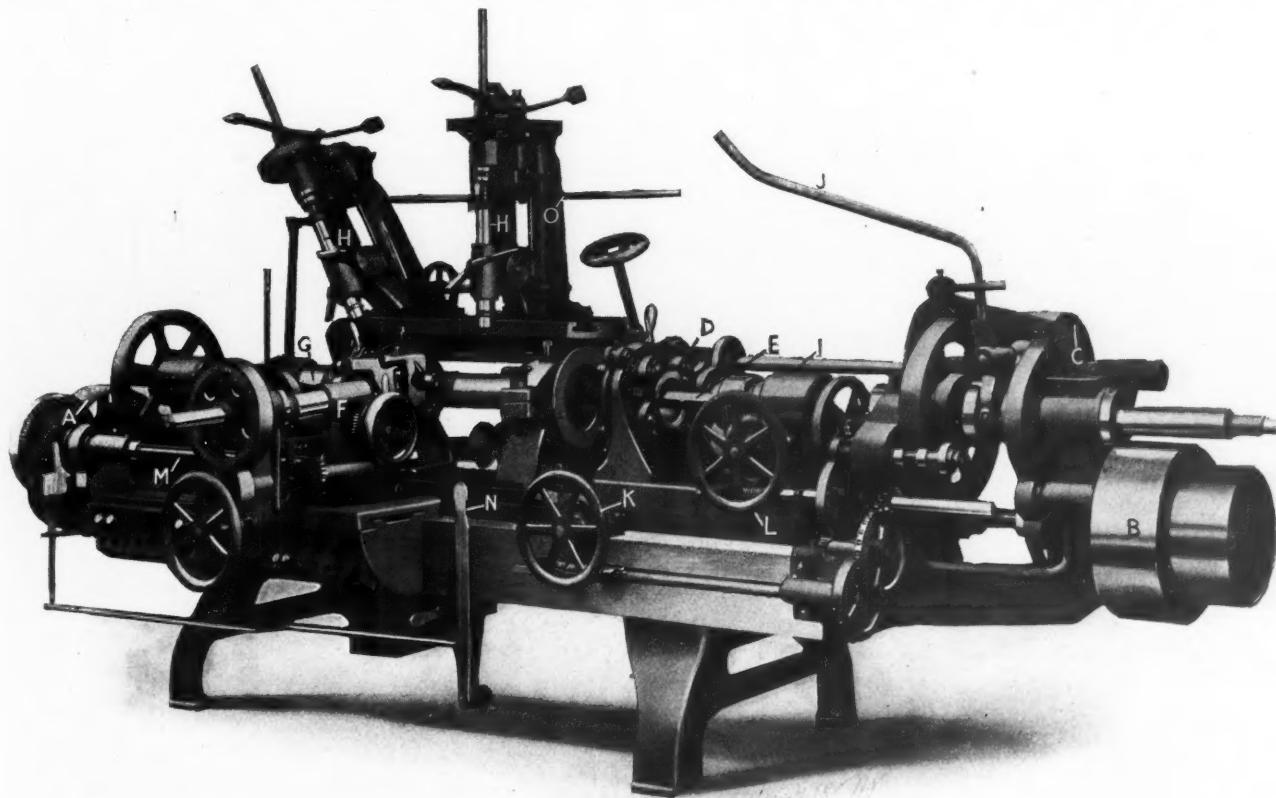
Special Machine for Machining Force Pump Casting shown in Fig. 2
